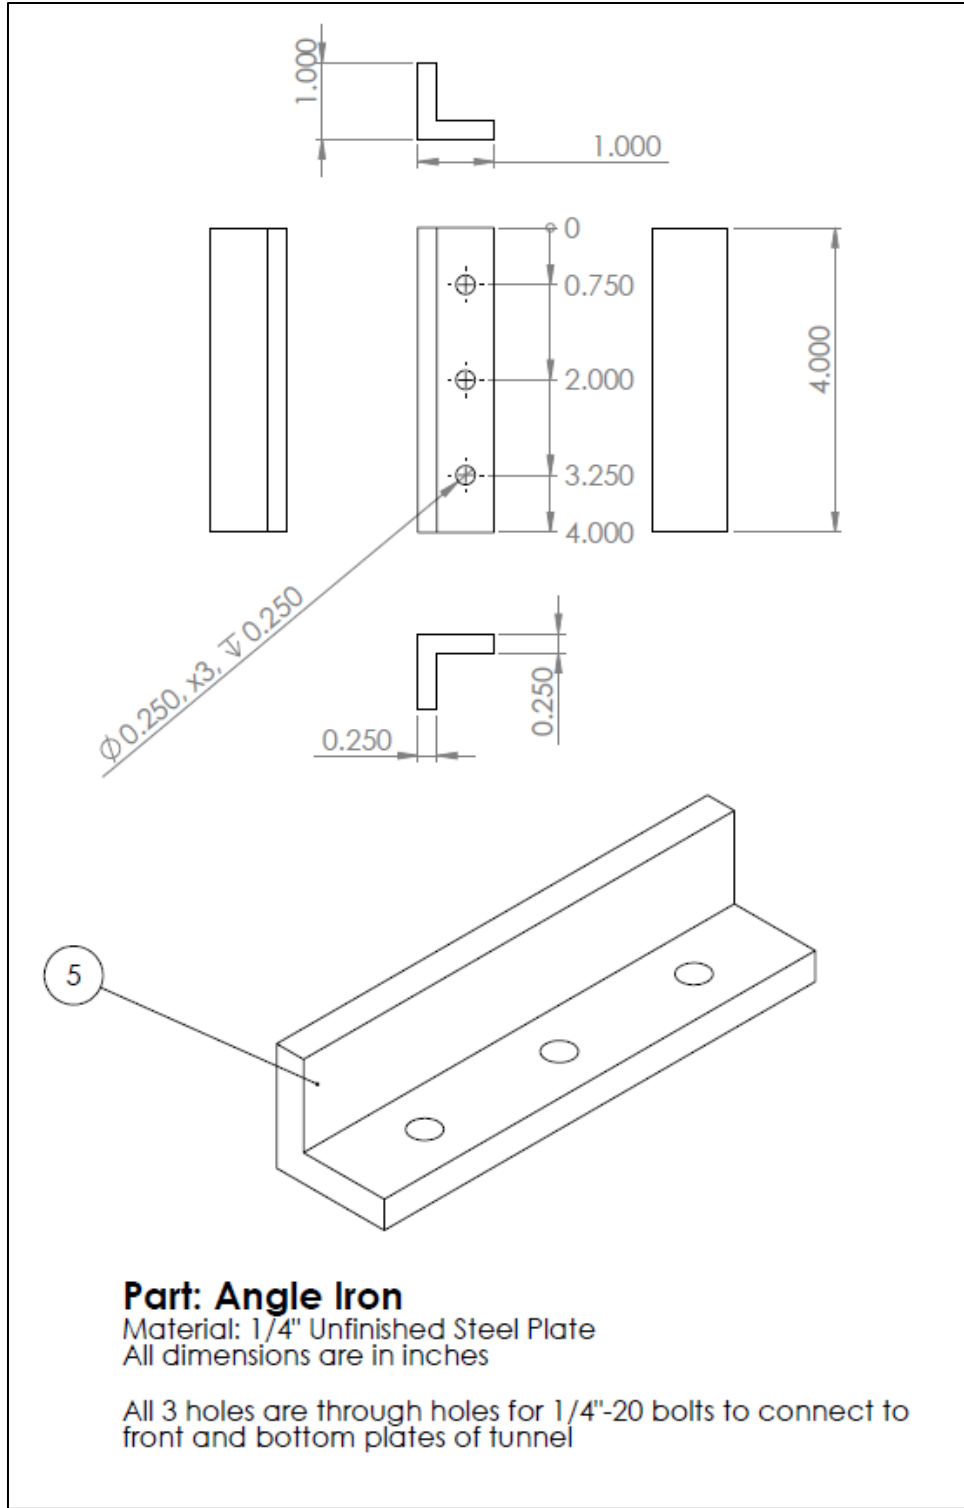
Final Angle Iron Design Technical Drawing for Cavitation Tunnel
